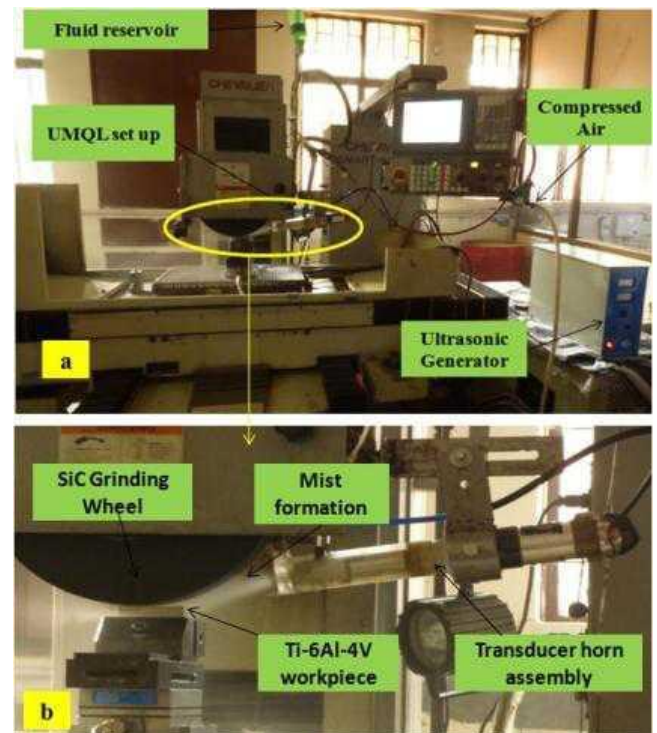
A Photograph of experimental set up: (a) Grinding Machine, (b) UMQL setup
